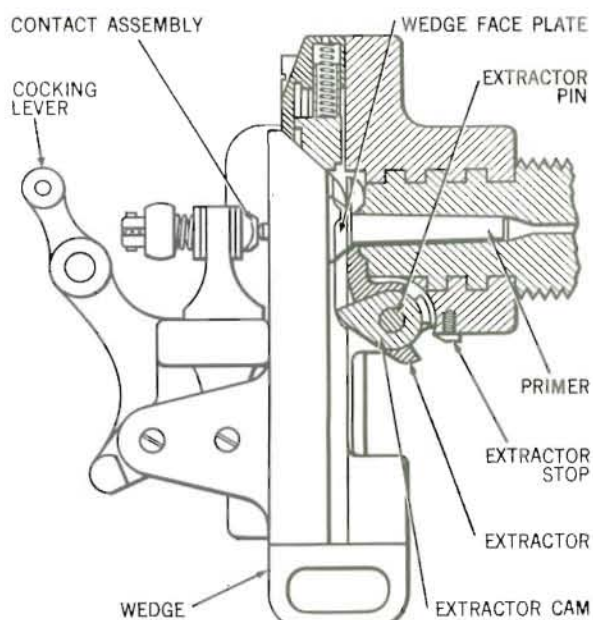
Firing Lock, Right Side, Sectional View - Wedge Closed
